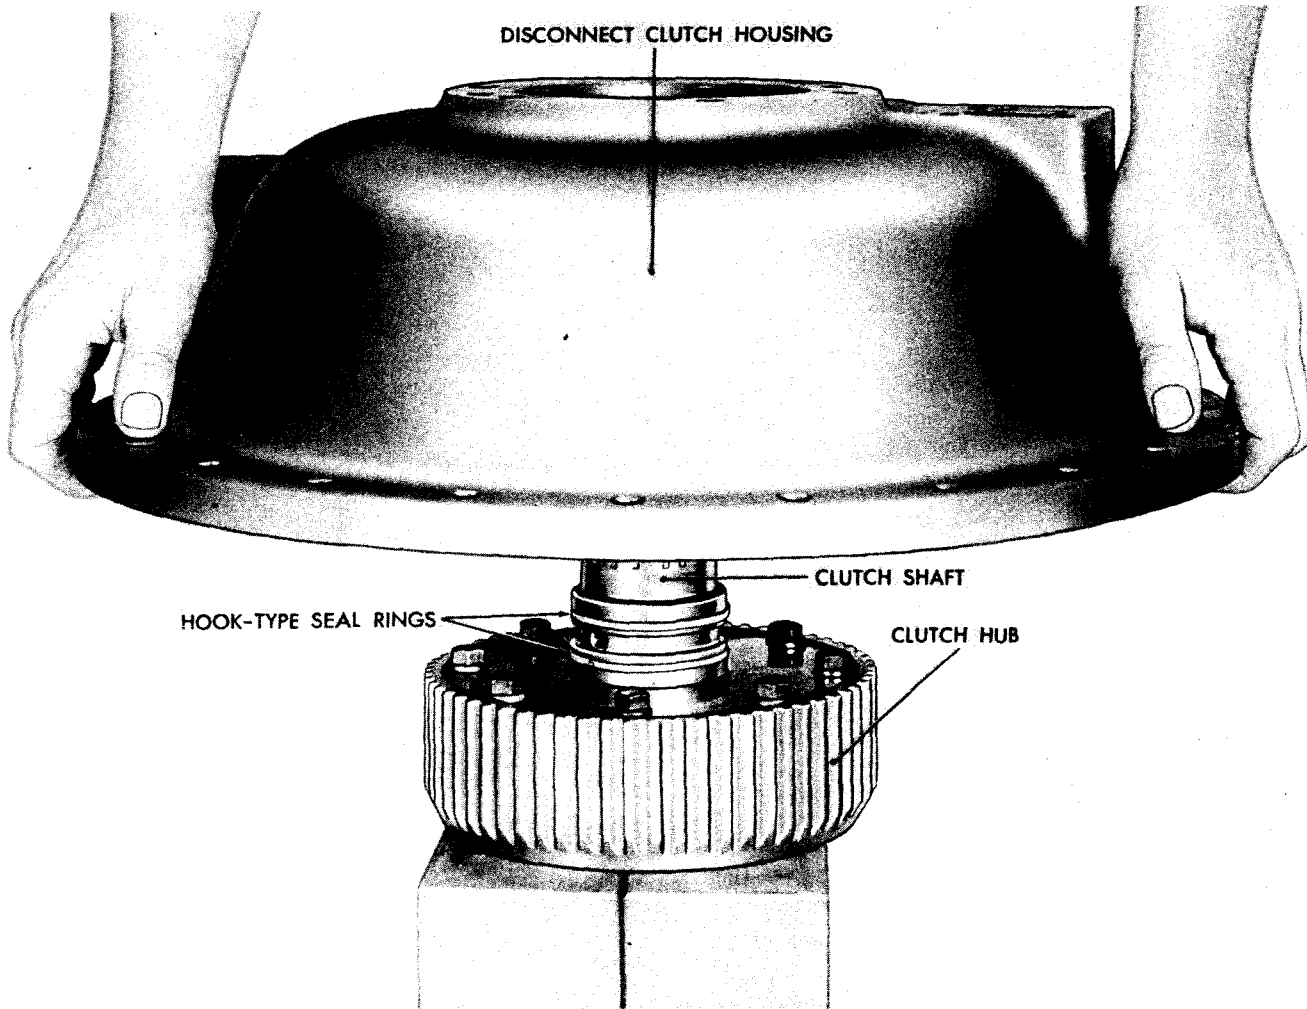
Installing disconnect clutch housing on clutch shaft and hub
